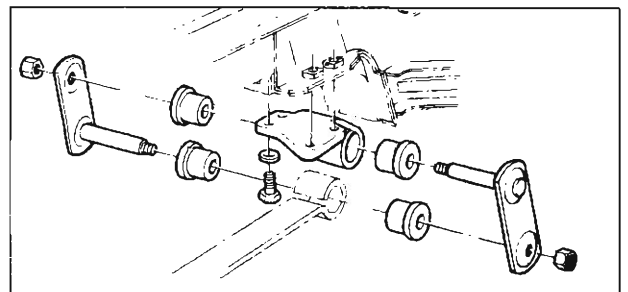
Rear Spring Shackle Exploded View—Station Wagon
